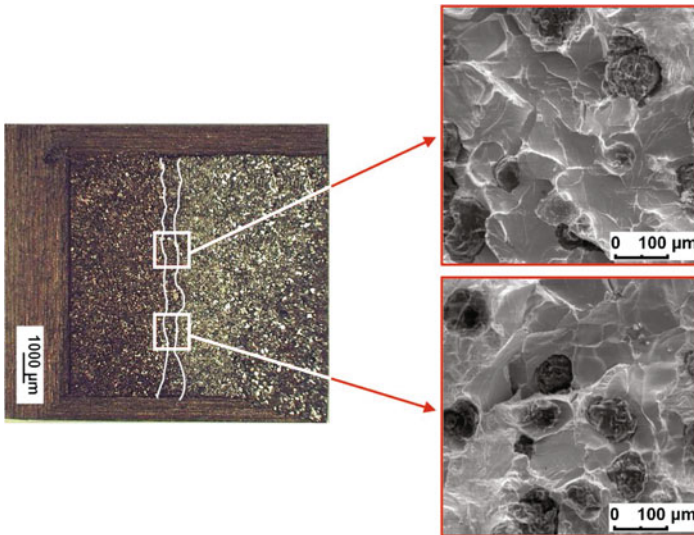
Cleavage crack extension on the fracture surface at -40 °C [24]
